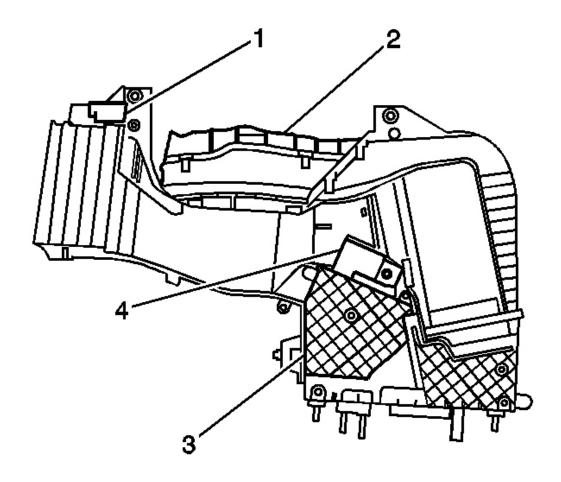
Removing/Installing Auxiliary Heater Core Cover Courtesy of GENERAL MOTORS CORP.
